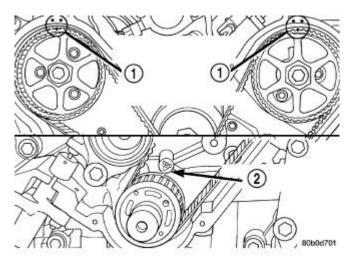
CAMSHAFT SPROCKET TIMING MARKS Courtesy of CHRYSLER LLC
